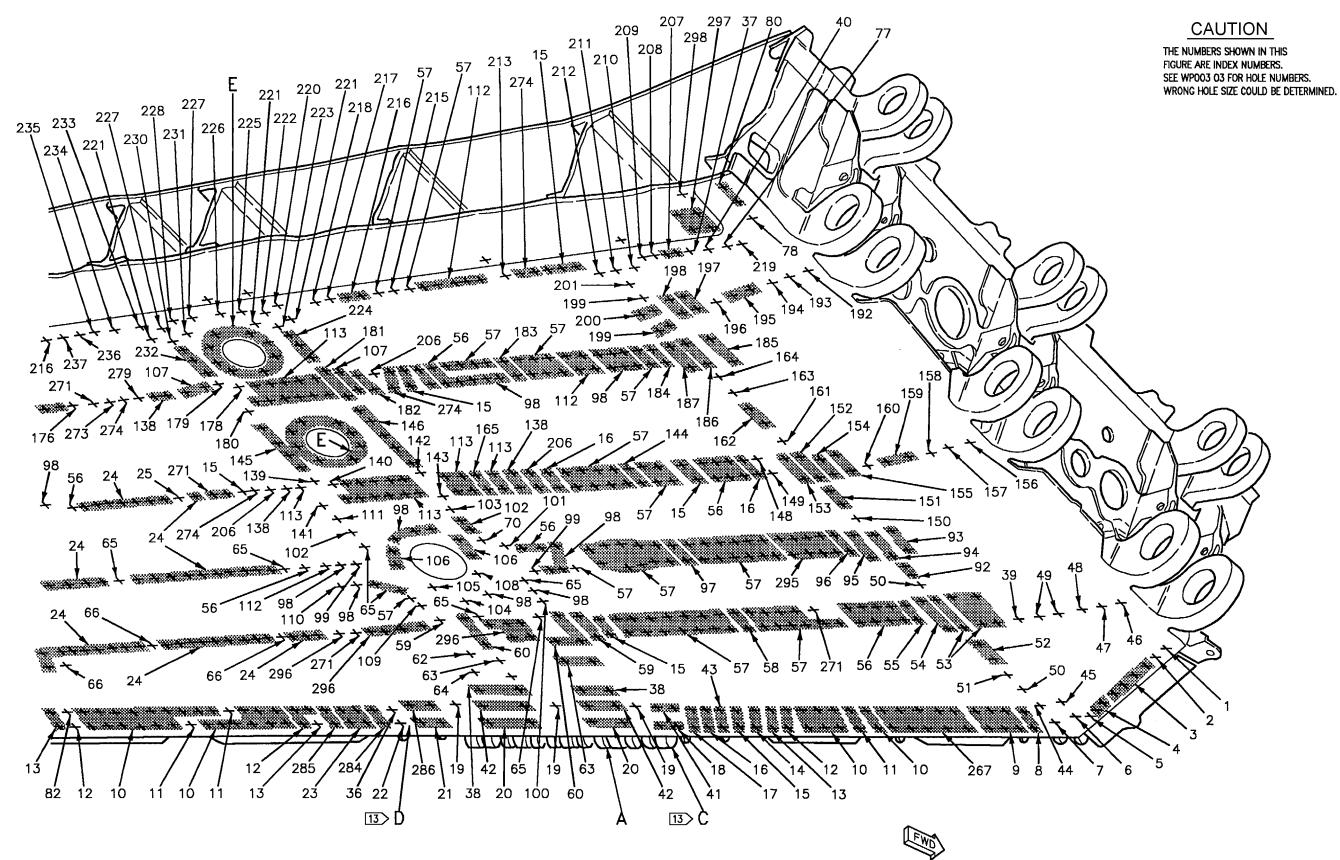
Skin (74A110601) Fasteners (Sheet 1)
